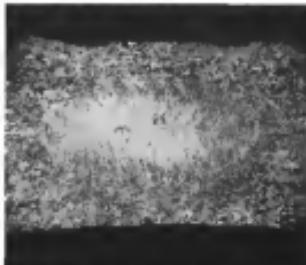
Longitudinal section of spot weld made on two pieces of 515S sheet without removing the oxide film
